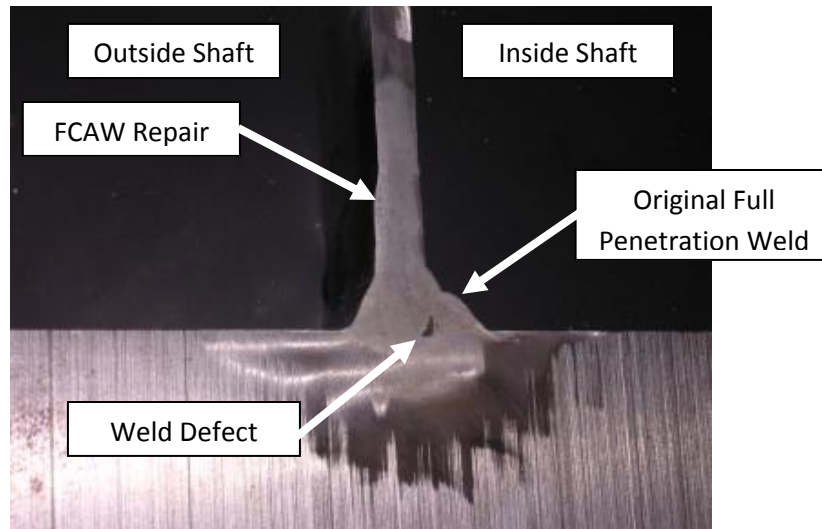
Polished Cross Section Through FCAW Repaired Weld
